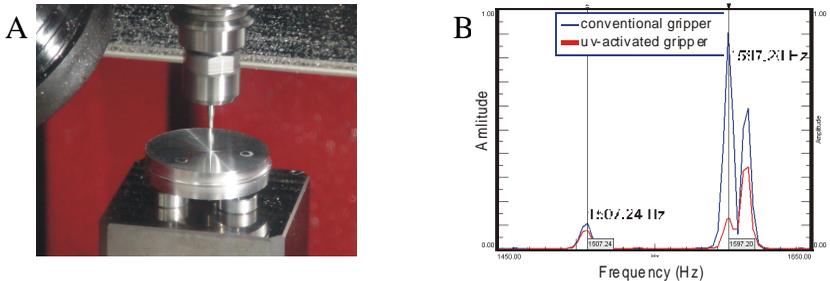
A. Micro-milling test on aluminium work piece; B. Modal analysis tests for the UV-activated and conventional gripper.
